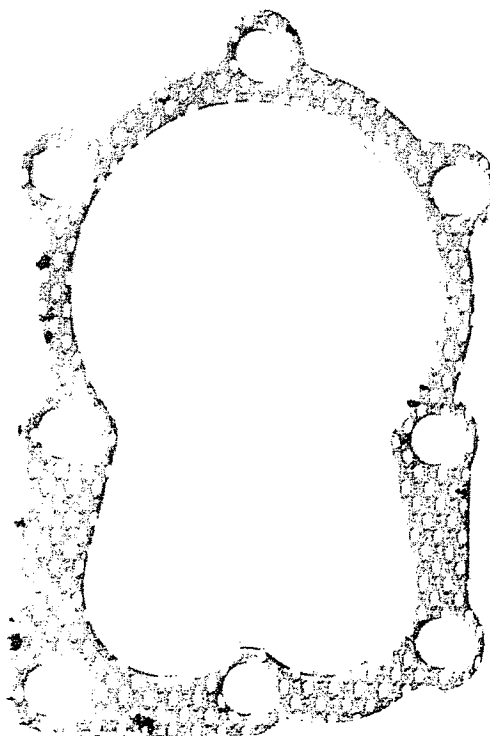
A head gasket forms a seal between the cylinder head and block.
